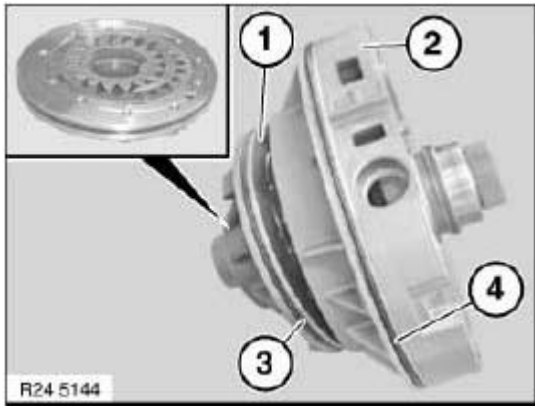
Identifying Cover, O-Rings And Pump Housing
